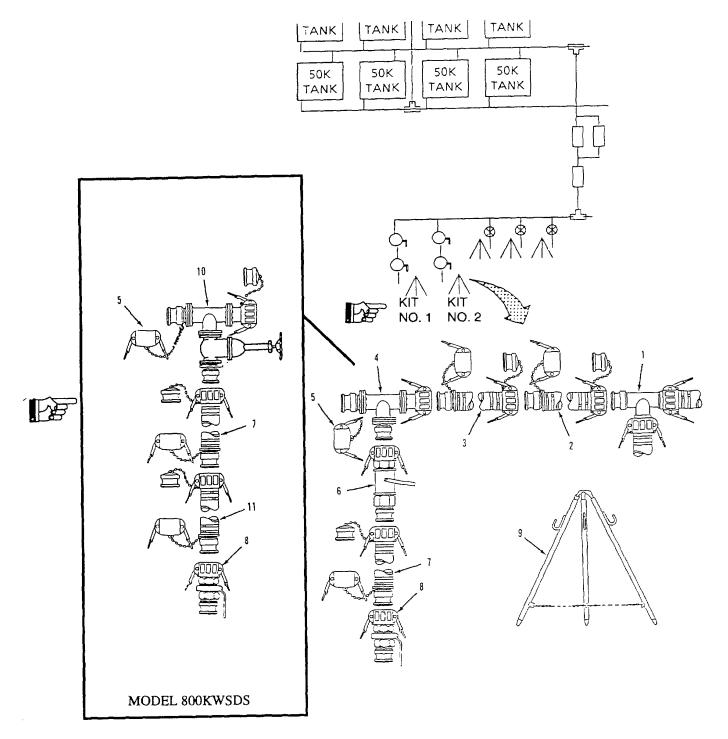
4-Inch Hose Connection Kit Assembly.
